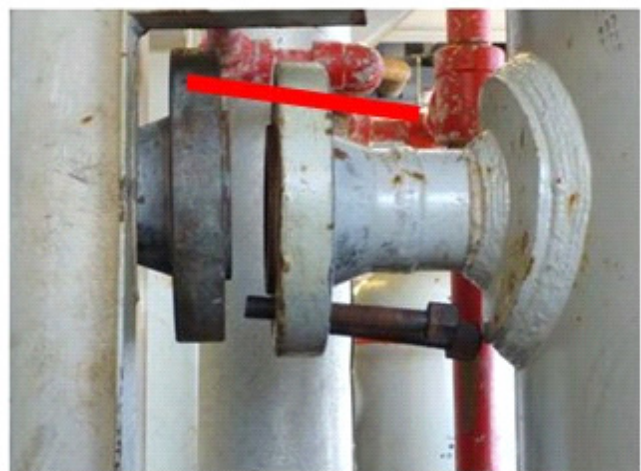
Flange Alignment Problem (discovered after removing bolts)
